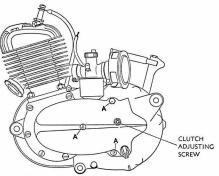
Clutch adjusting screw location on models 4F, 6F and 9F. Remove screws marked "A" for access to breaker points.
